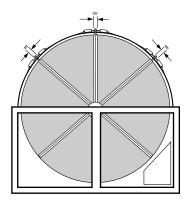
4. Tighten the bolts of the clamping straps lightly, and make sure that the distances are the same at each spoke. Remove the rotor assembly locking devices (see Fig. 9:1).
